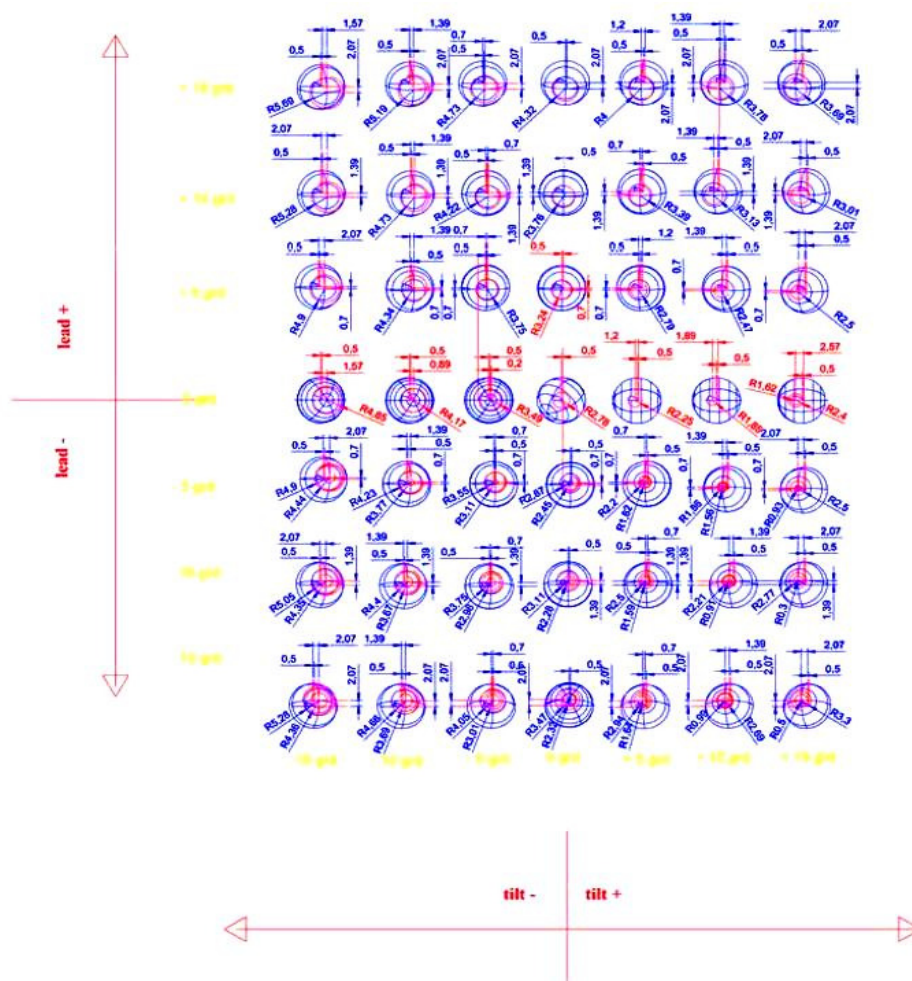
Changing of position radius for axial depth of cut = 0.5 mm, cutting tool radius = 8 mm, tool tilt (left/right) = (-15°...+15°), lead (front/back) = (-5°...+15°).
